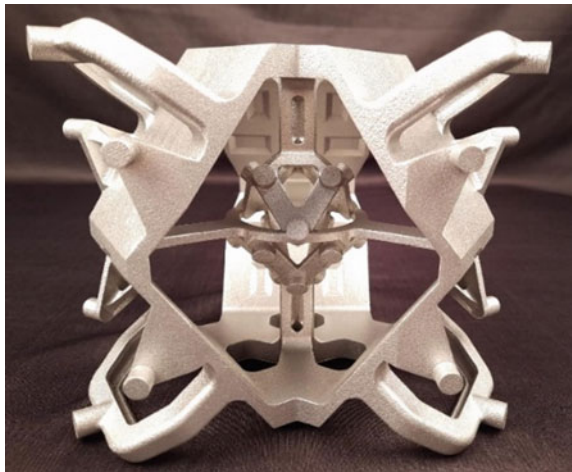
Modified cluster 3D printed by Direct Metal Laser Sintering
